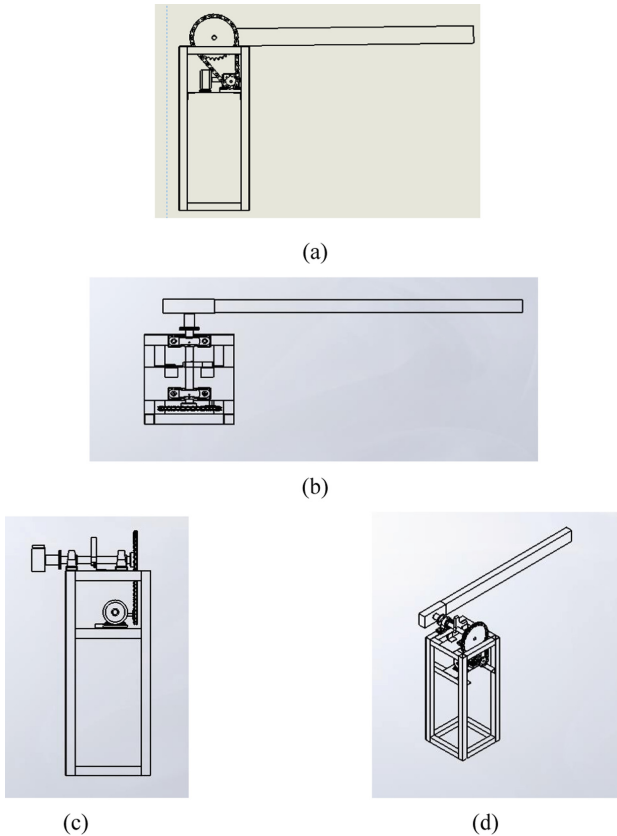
2D design of boom gate mechanical system (a) Front view (b) Top view (c) Left view (d) Isometric view
